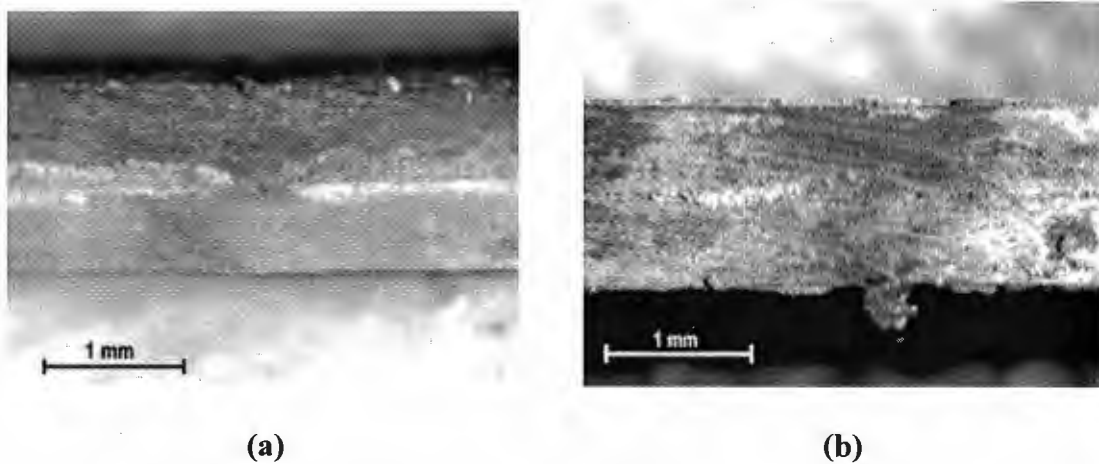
(a, b) Transverse sections of lap-welded sheets using the “vent hole” approach show no evidence of cracking in both the weld and bead.
